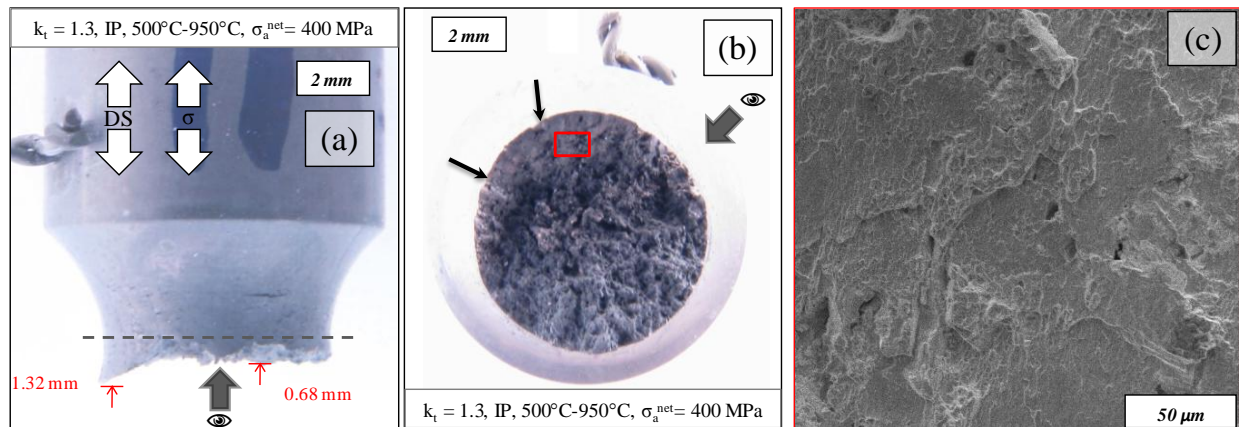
(a-b) Fractured IP TMF specimen. Crack initiated and grew on crystallographic plane. (c) Micro voids seen on the fracture surface. Black arrows display location of crack initiation.
